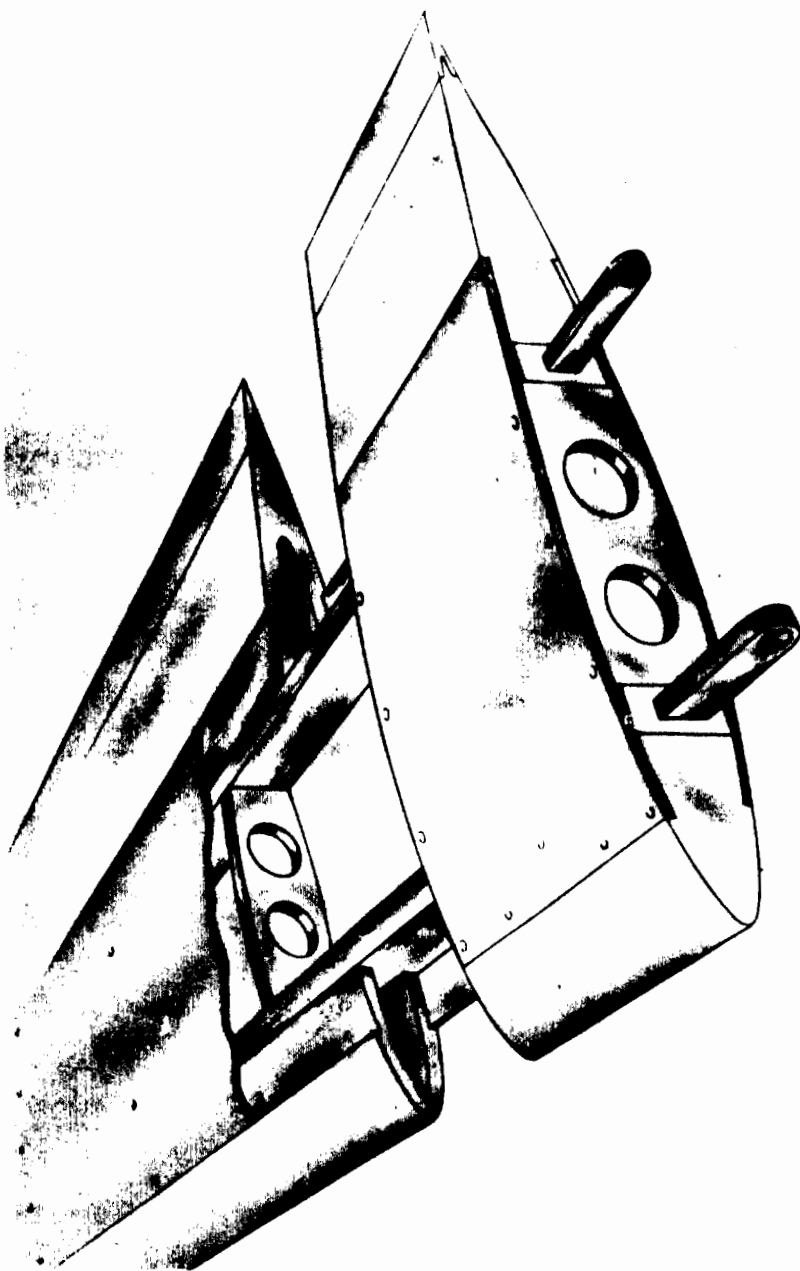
Schematic Drawing Illustrating the Construction of the Rigid Wing
